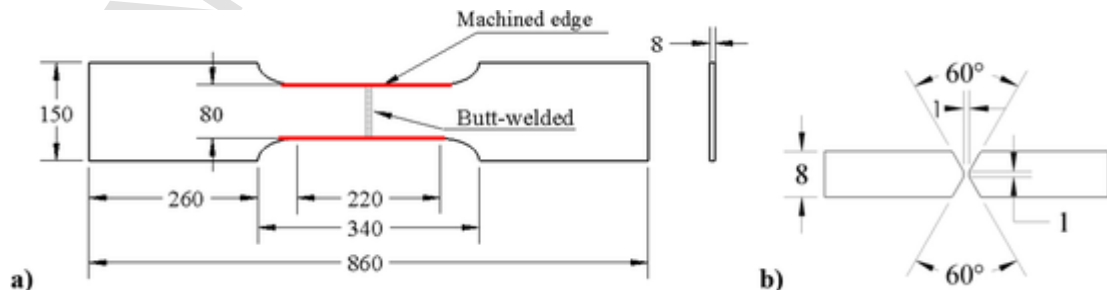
(a) The geometry of welded specimen and (b) double-V groove shape for GMAW. (Dimension in mm, not to scale).
